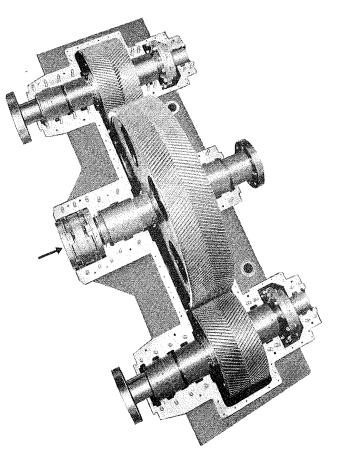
Reduction gear set for marine Diesel engine, with six-shoe thrust bearing.
